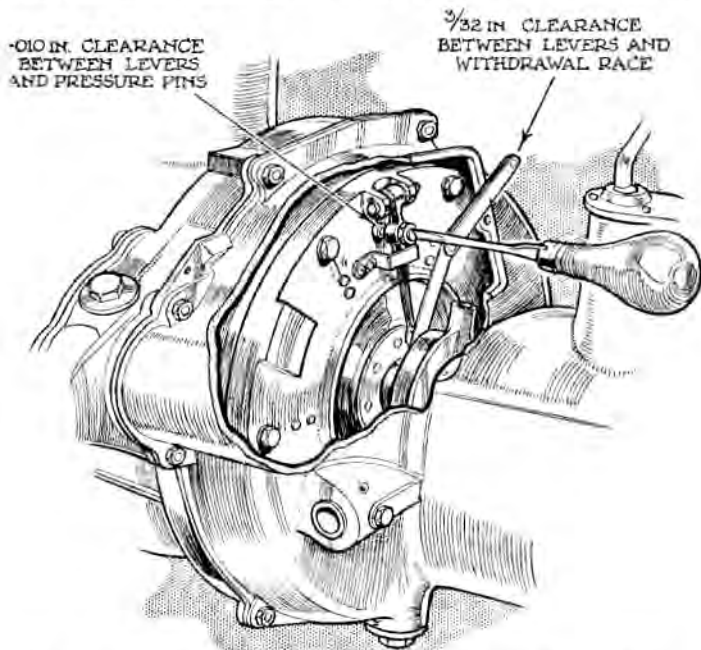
ADJUSTING THE CLEARANCE OF THE CLUTCH TOGGLE ARMS
